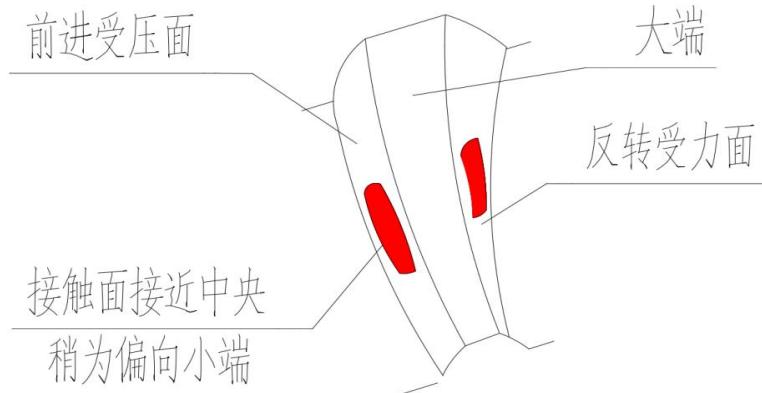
Correct imprint on passive spiral bevel gear
